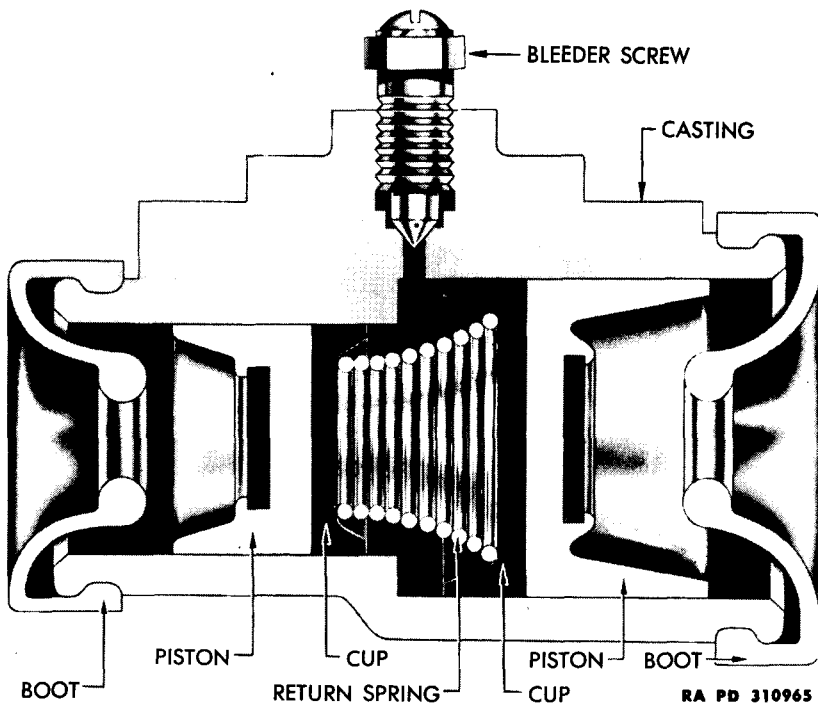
Step-bore Wheel Cylinder with Disk Insert Type Piston
